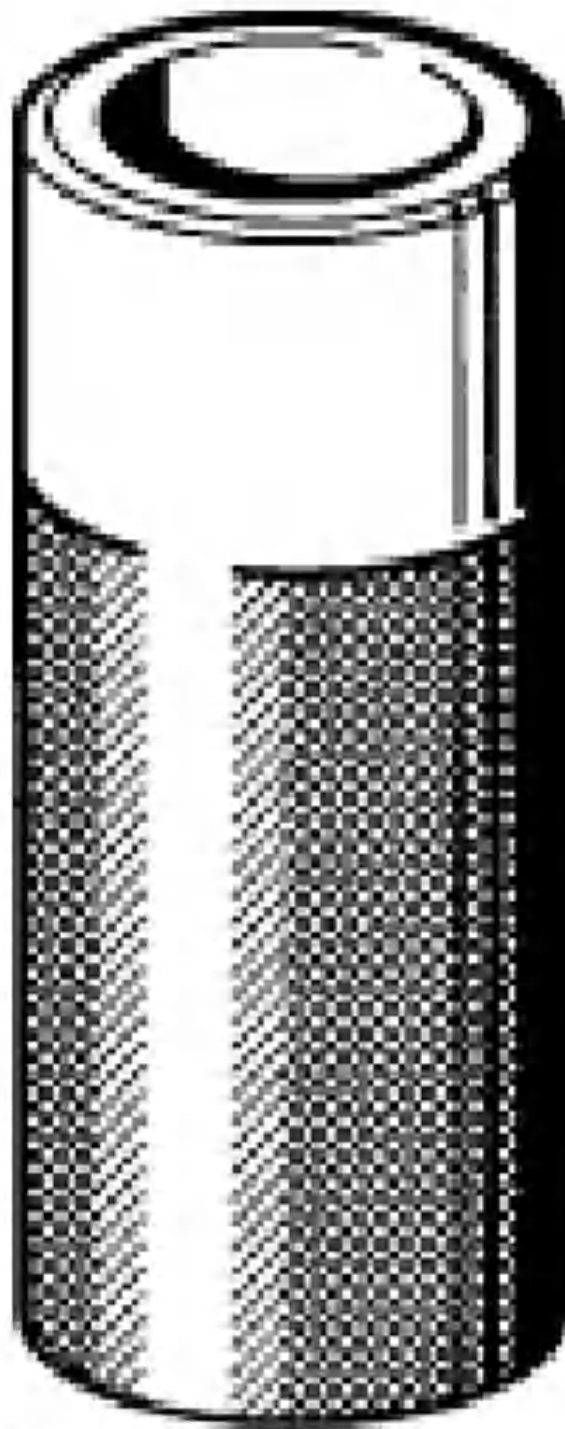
Identifying Special Tools 23 1 020 Fixture For Removing Transmission Casing (Front And Rear Section)
